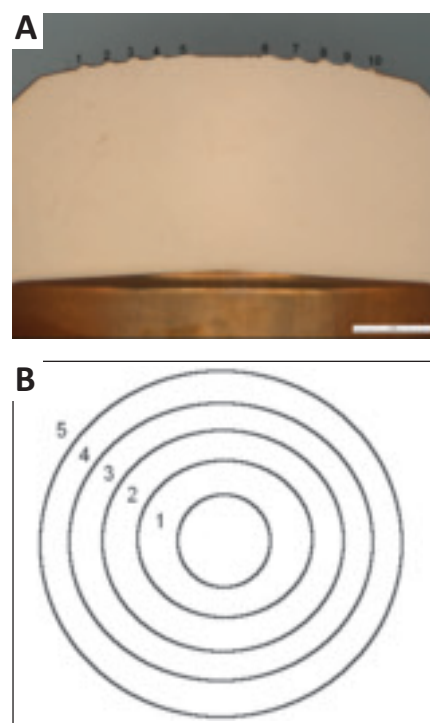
Peak numbering system. A — Mounted electrodes; and B — numbering for the weld face rings.
